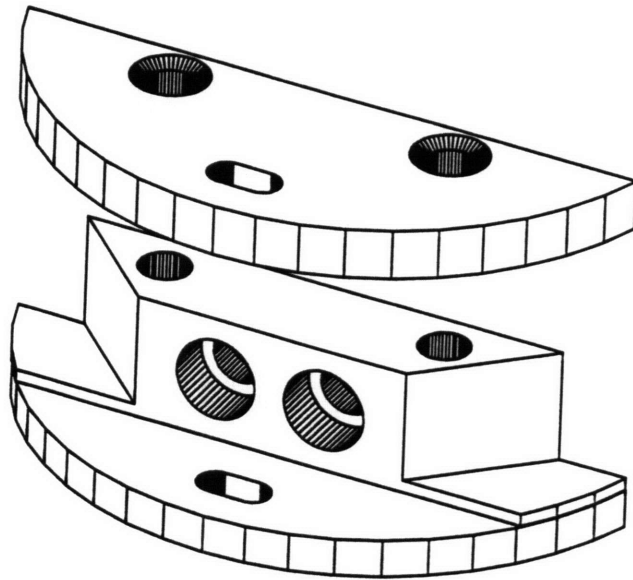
Re-design of the Ring Guide for Improved Access to the Ring Holder.
